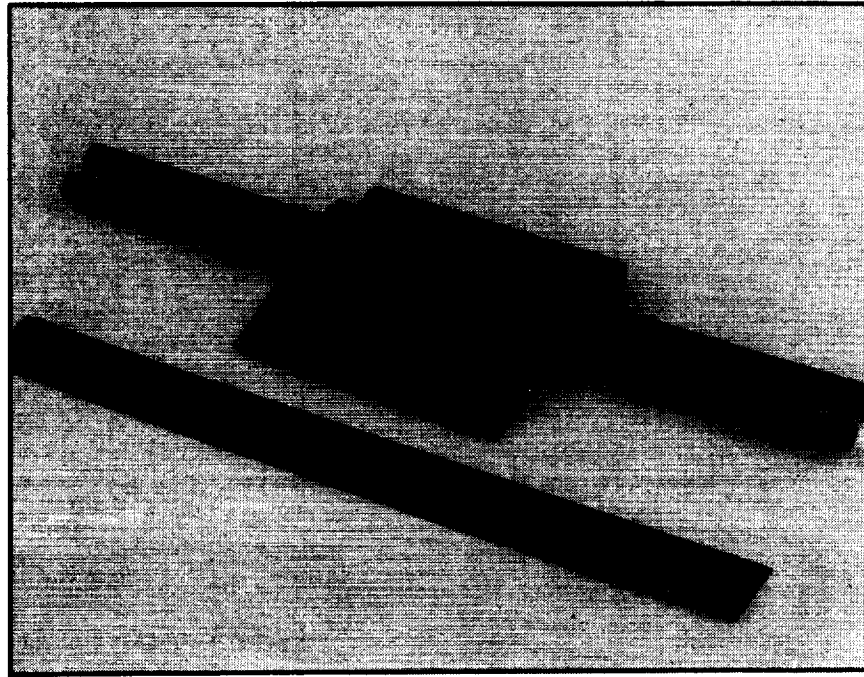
Brazed Strut Leading-Edge Test Specimen (3 in. Long)
